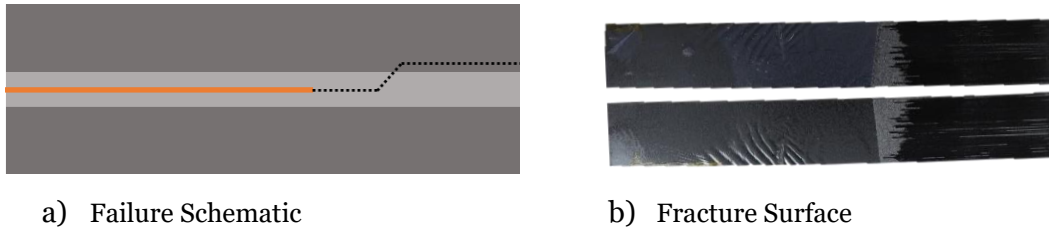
Failure schematic and fracture surfaces for 0.4mm ENF specimens at HTD conditions
